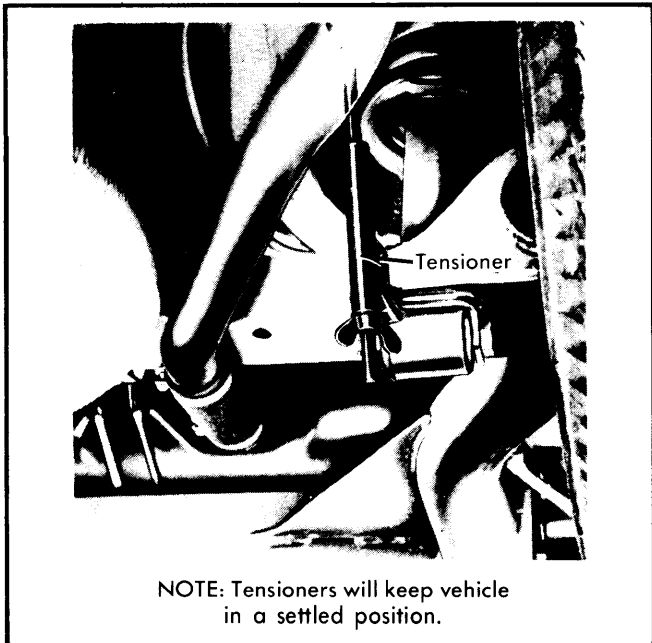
Tensioner Position on Scirocco (Dasher Tensioner is Mounted With Wing Nut on Top)
